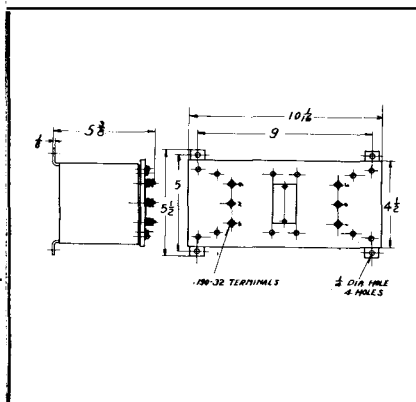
Outline Dimensions and Drilling Plan for Phase Shifting Transformer used with 3-phase, 4-wire Var-meter.
